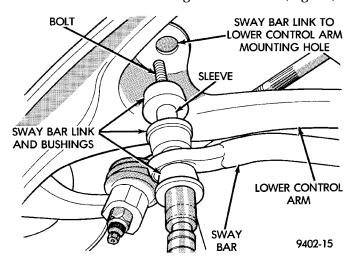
Assembled Stabilizer Bar Link And Bushings
